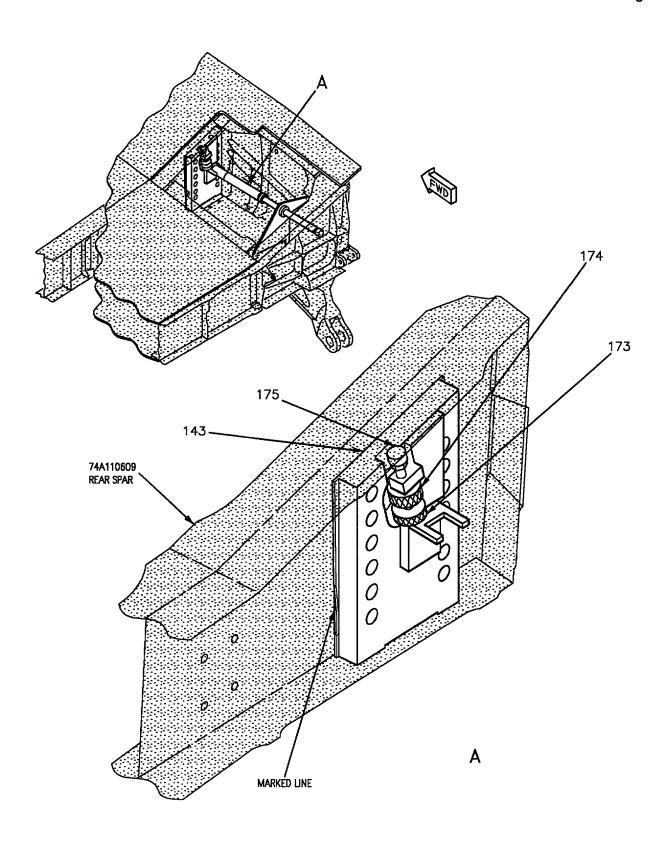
Installation of RE174110964 Locating Tool (Sheet 1)
